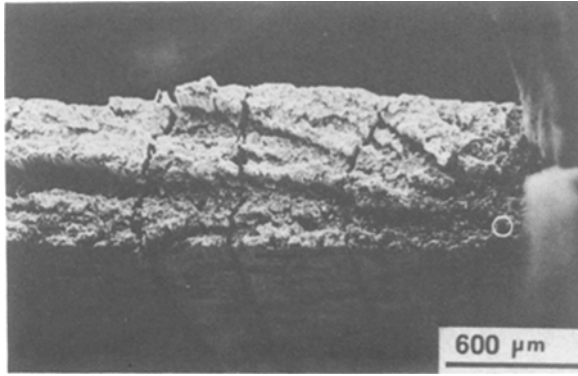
The segment of the fracture surface marked 2 in Fig. 7. The local crack origin is marked O.
